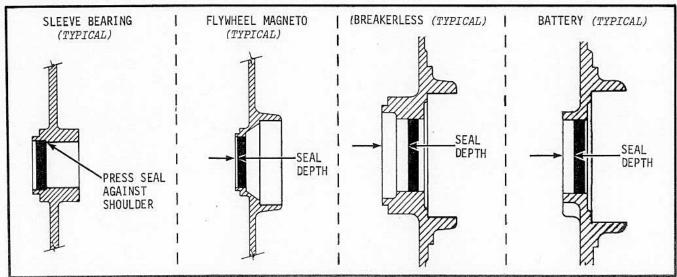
FRONT OIL SEAL LOCATION
